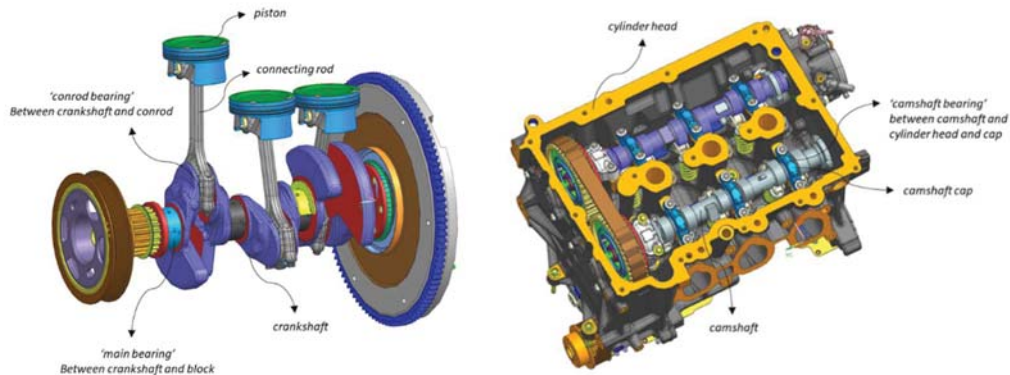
Engine Bearings (Crankshaft Main Bearing, Connecting Rod Bearing, Camshaft Bearing)
